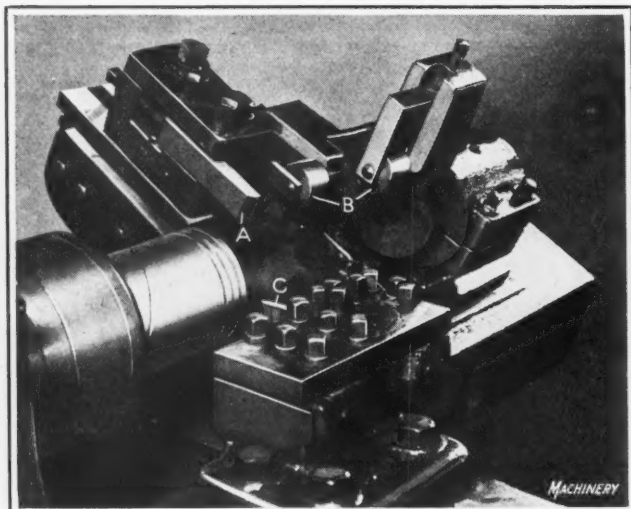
Gridley Automatic equipped for rough-turning Outside Diameter, facing Closed End, and rough-turning Ring Grooves
